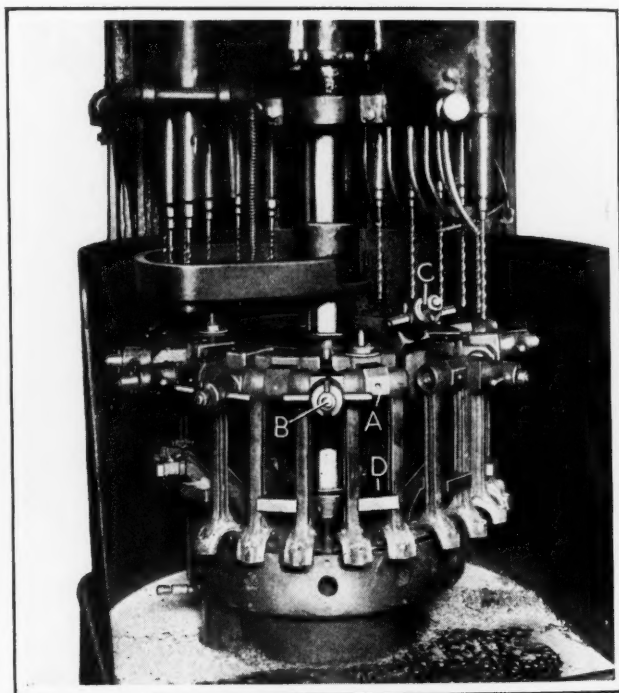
Multiple-spindle Operation which has Materially Reduced the Time of Drilling the Hole through Connecting-rod Arms
